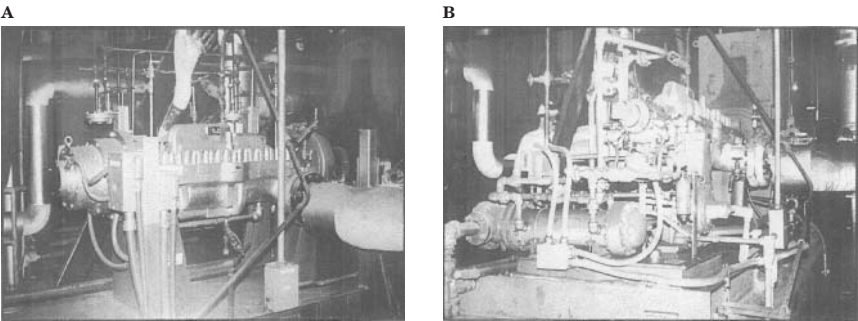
Multistage pumps installed in boiler feed service [610 hp (0.46 MW)]: a) pump with magnetic bearings; b) the same pump with oil-lubricated bearings. (Flowsolve Corporation)
